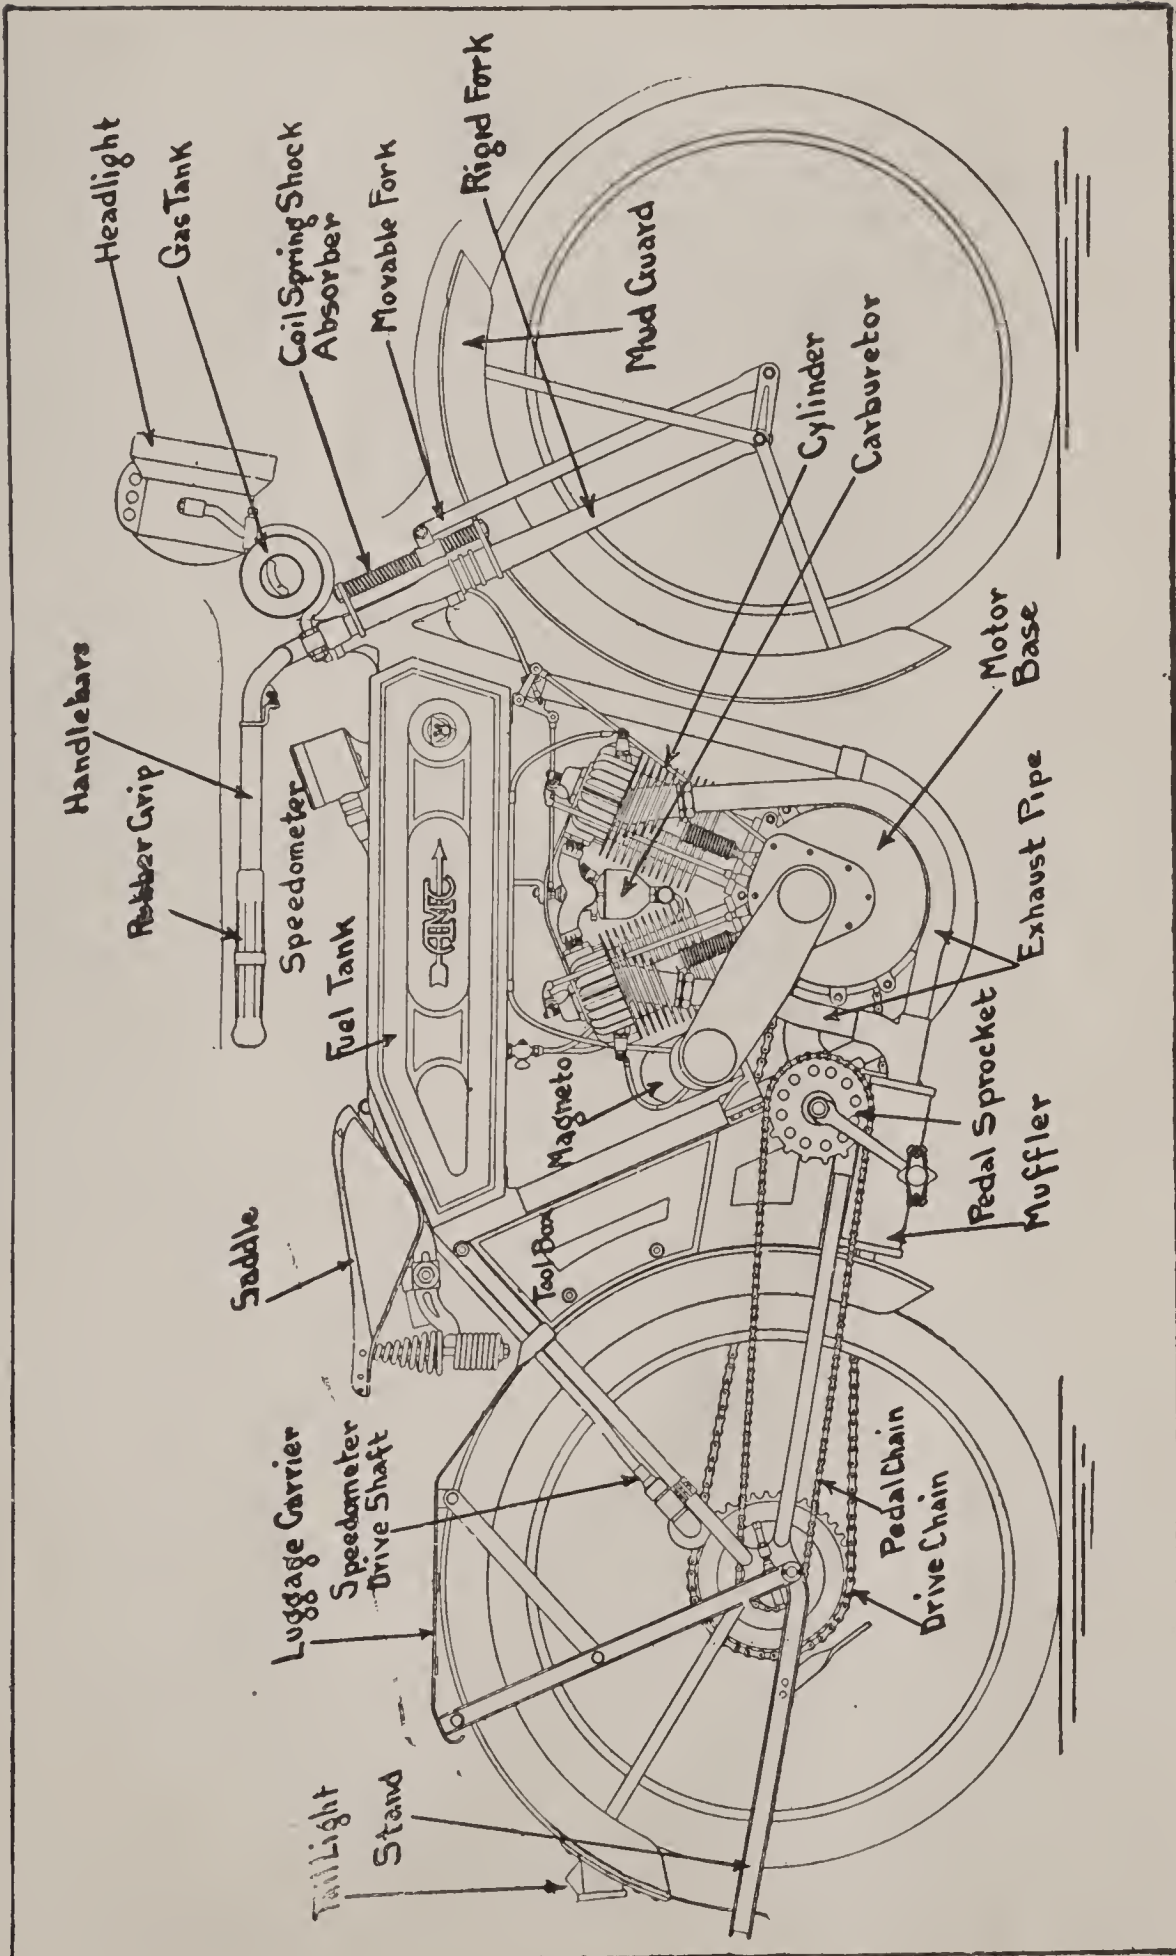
The AMC Twin Cylinder Motorcycle With Full Equipment.
